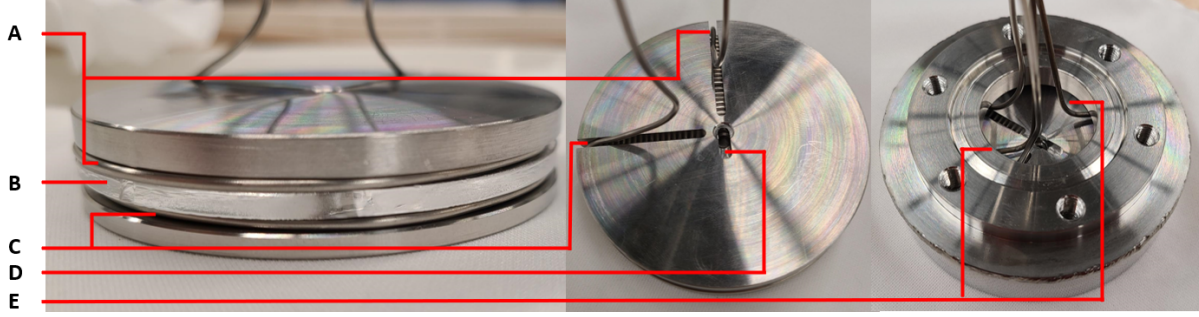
As-built heater assembly: (a) axial guard heater, (b) quartz insulator, (c) main heater, (d) center thermocouple slot, and (e) side thermocouples placed in welded heater assembly cup.
